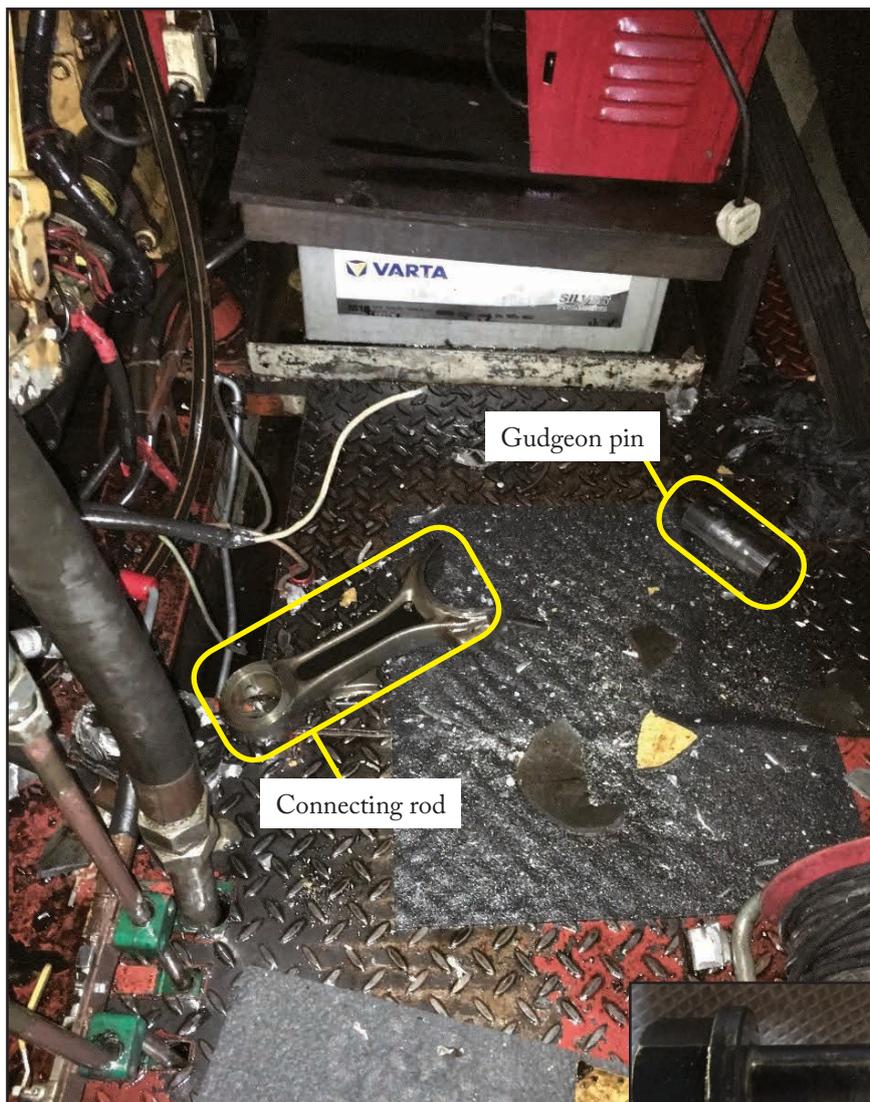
Connecting rod, piston and gudgeon pin ejected from the engine (inset: failed bottom end bearing bolt)
